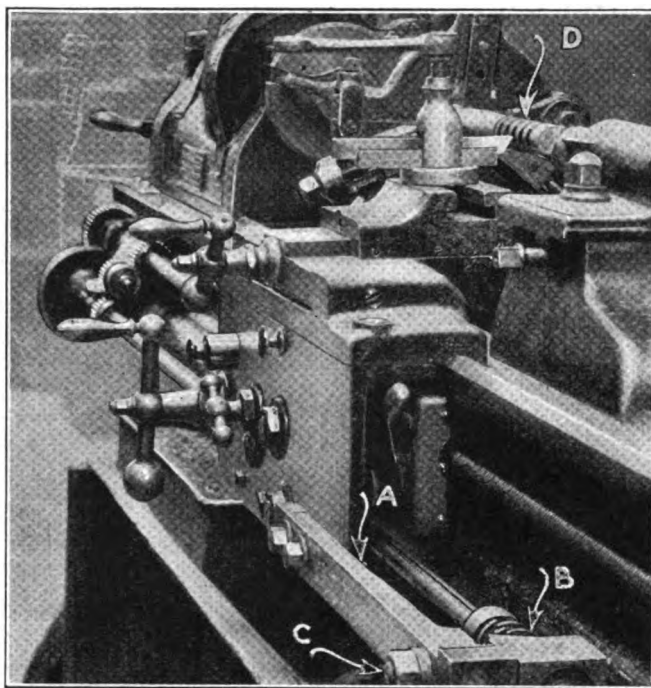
LATHE RIGGED FOR CUTTING DIAMOND SCREWS (OBLIQUE VIEW)
